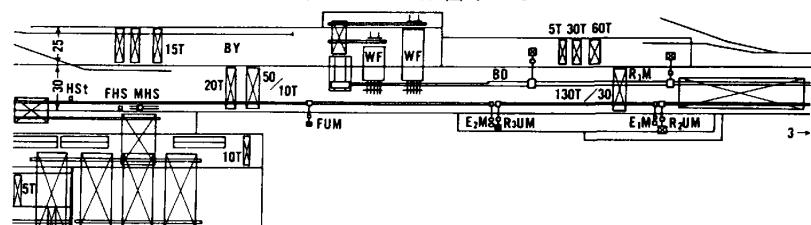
RAIL & SHAPE·MILL LAYOUT (YAWATA WORKS)
